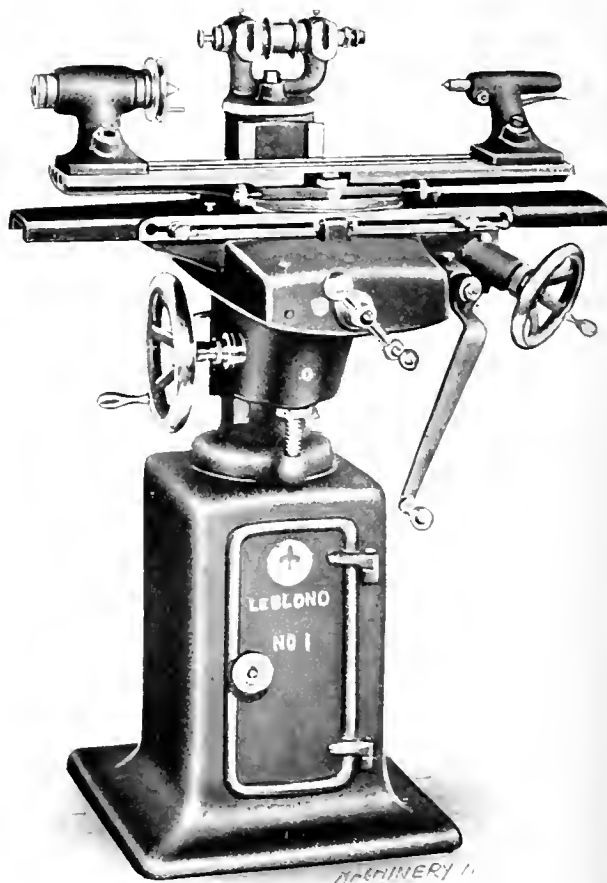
The Universal Cutter and Tool Grinder built by the R. K. Le Blond Machine Tool Co.
